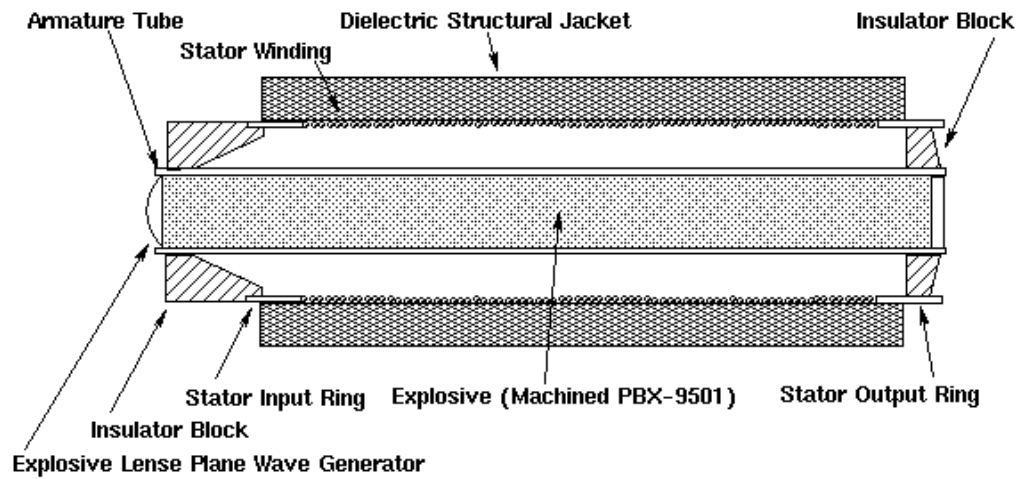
EXPLOSIVELY PUMPED COAXIAL FLUX COMPRESSION GENERATOR
